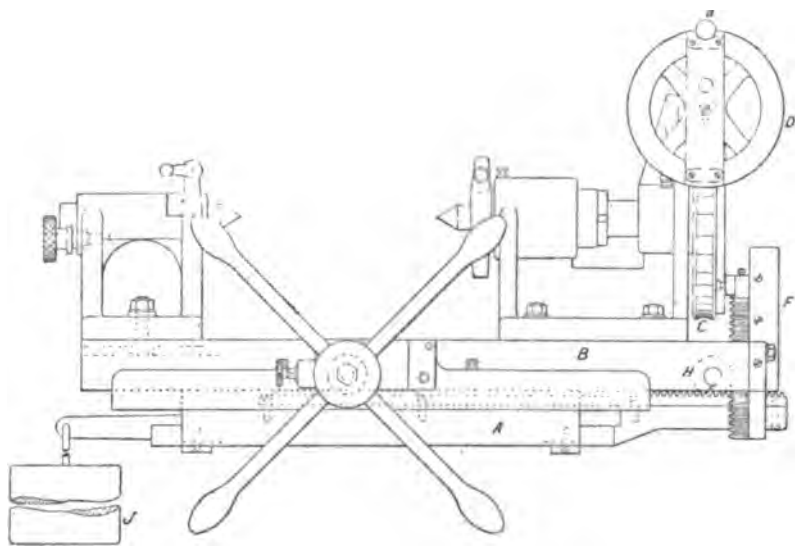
Front Elevation of Cam-cutting Attachment.
